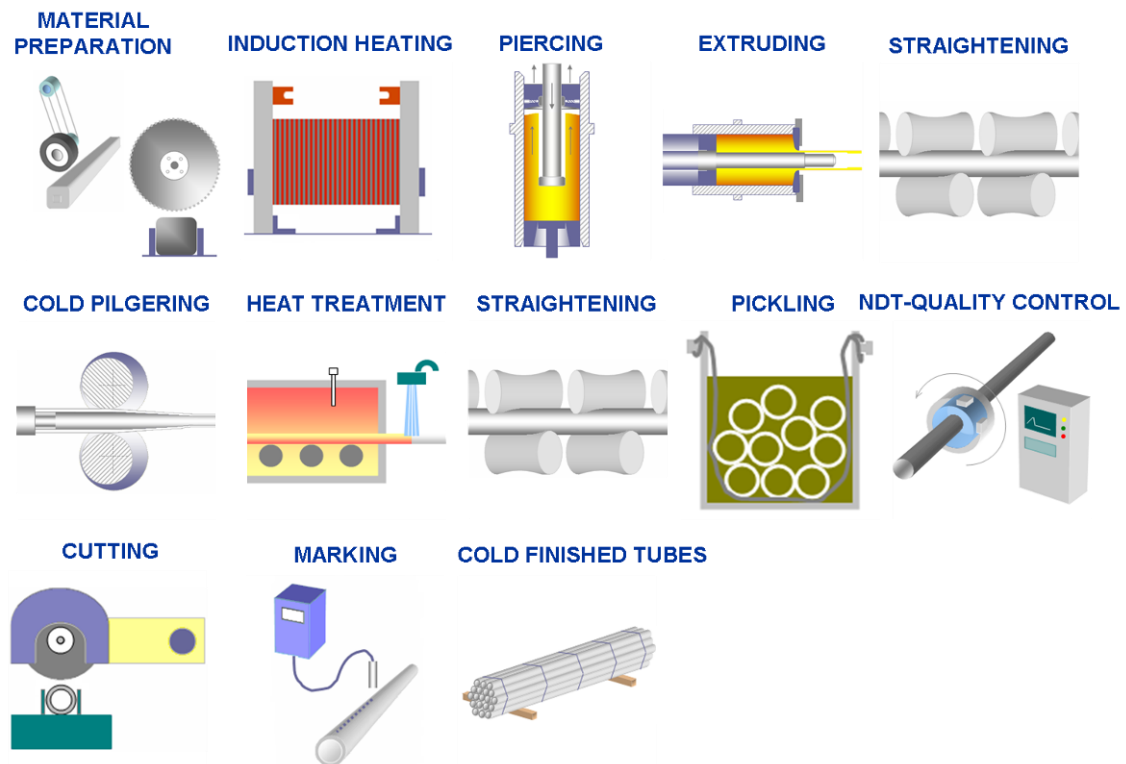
Manufacturing process of cold finished superheater tubes [26].
